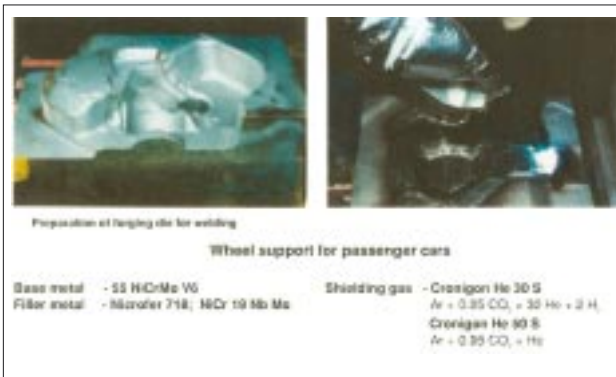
Pulsed MAGM weld surfacing of forging dies
